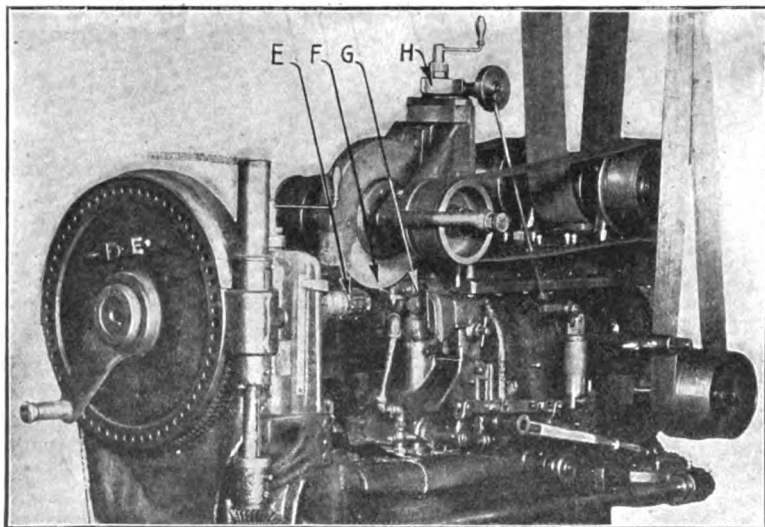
E, gear to be ground; F, grinding wheel just before entering gear; G, grinding wheel automatic trimming device; H, automatic device for feeding wheel down as it wears away
